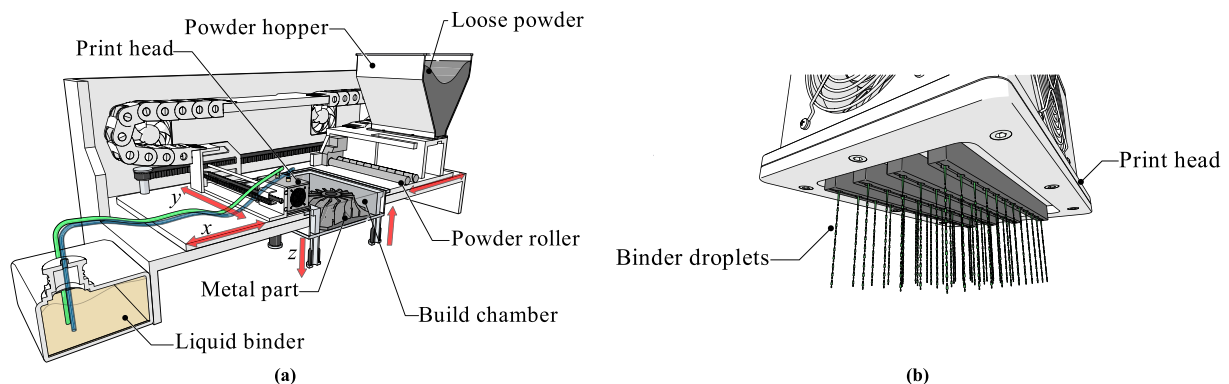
(a) Schematic of a typical BJ machine (b) BJ print head.
